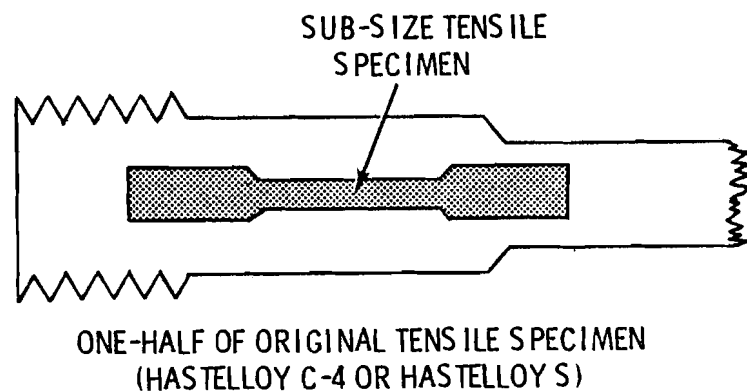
Subsized Tensile Specimens to be Machined from Sections of Tested Specimens
